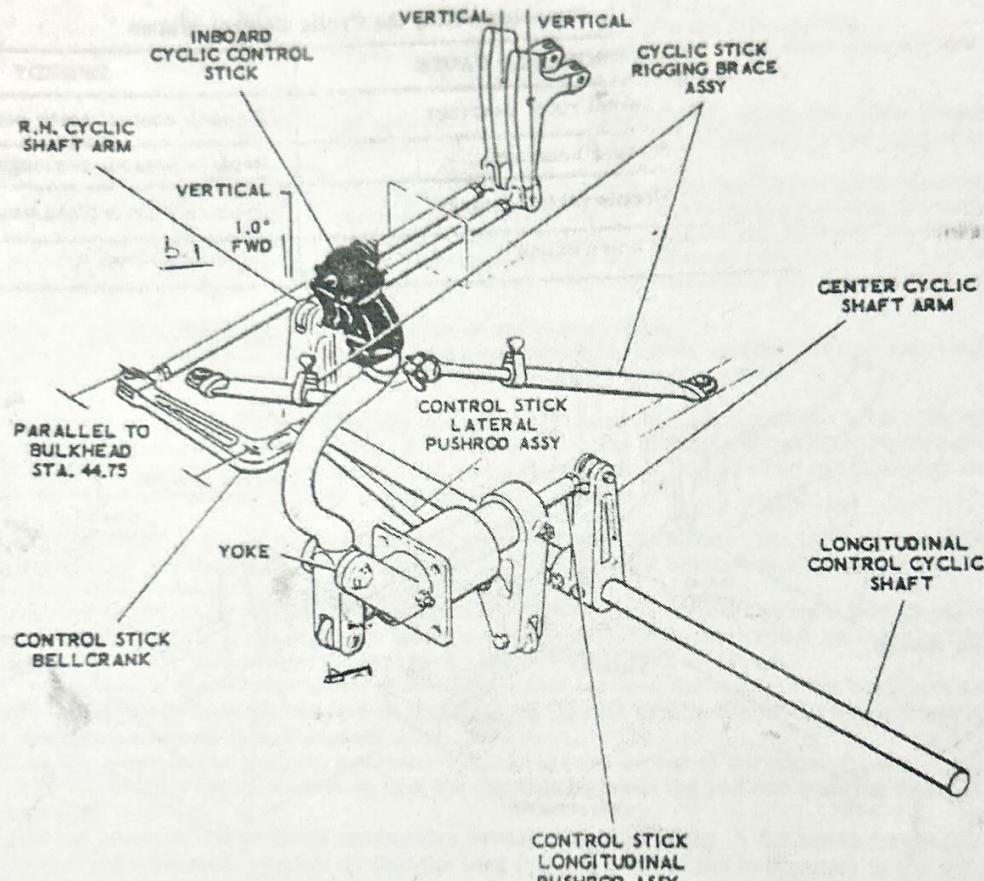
Cyclic Control Stick Adjustments (sheet 1 of 2)
